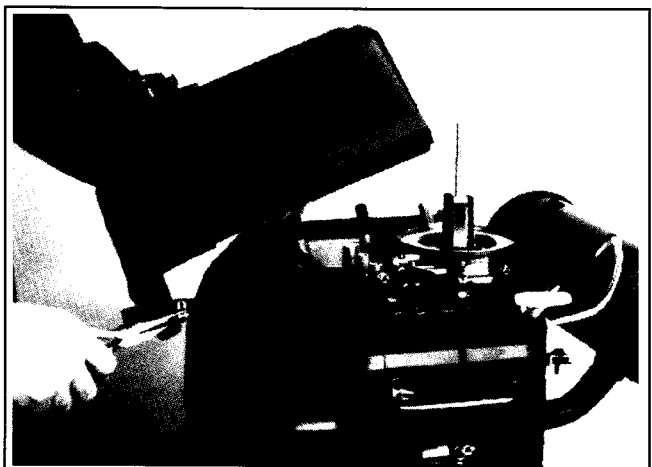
Removing Engine-Mounted Fuel Tank.
